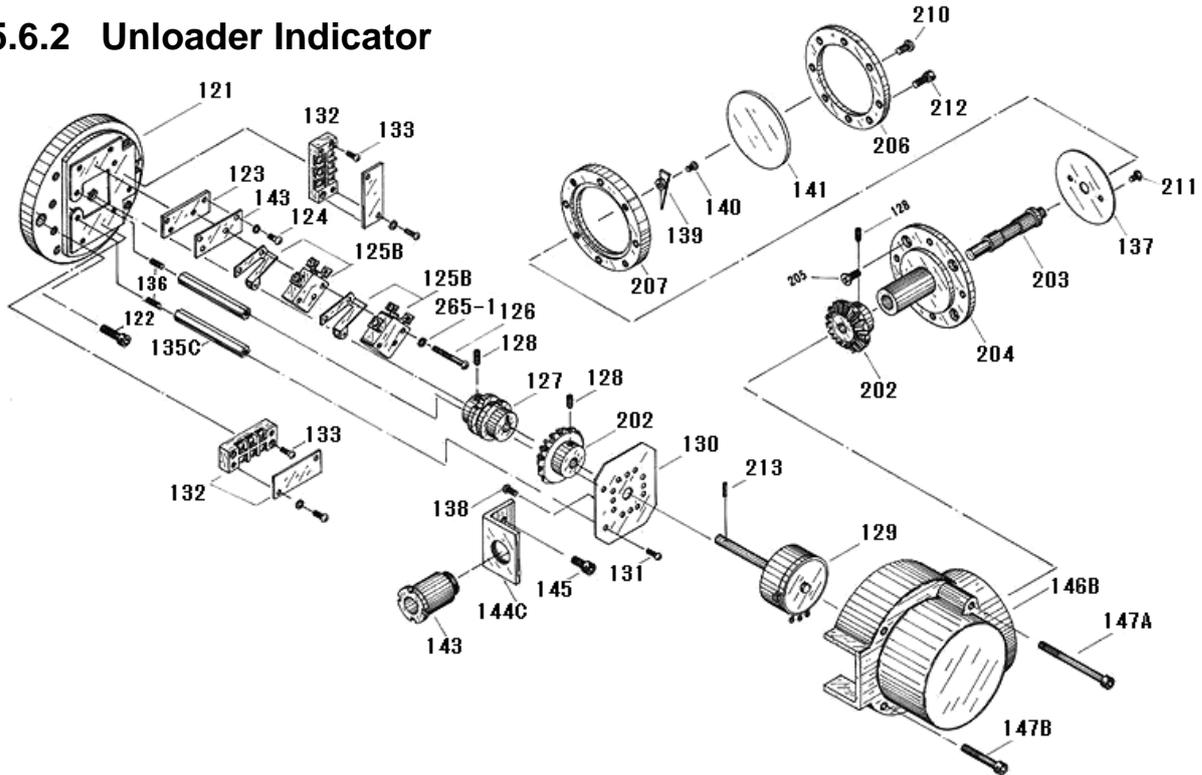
Development View of the 1612C Standard-type Low-stage Indicator
